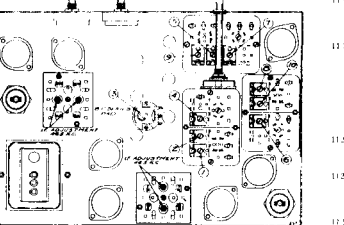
BOTTOM VIEW SHOWING TRIMMERS
